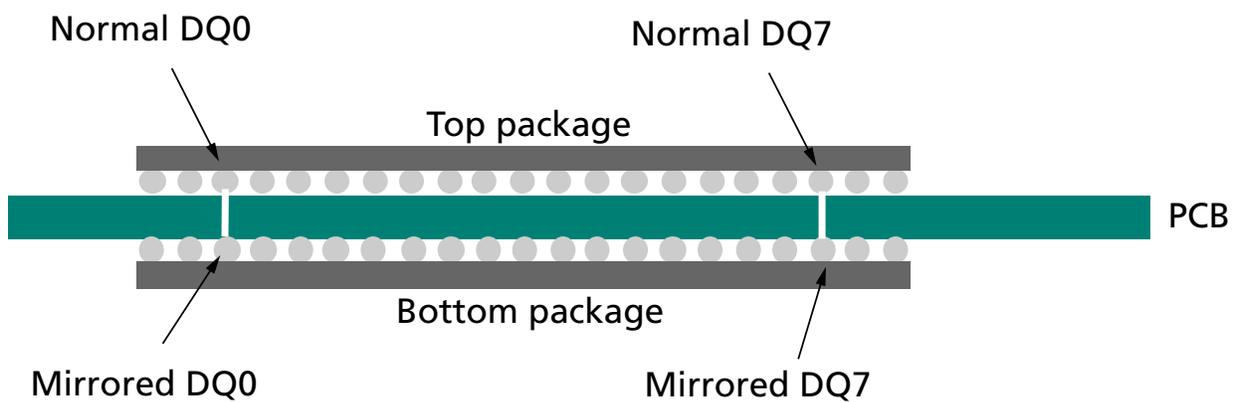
Example PCB layout of a two-sided system with electronic mirroring of DQ[7:0]
